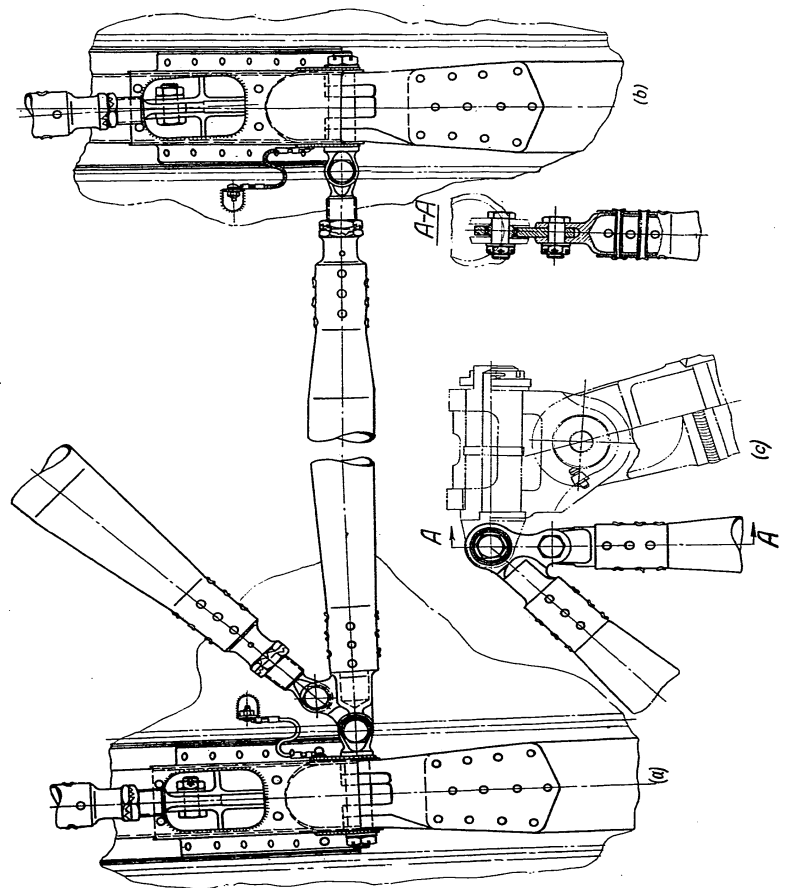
EXTERNAL TANK ATTACHMENT UNITS
